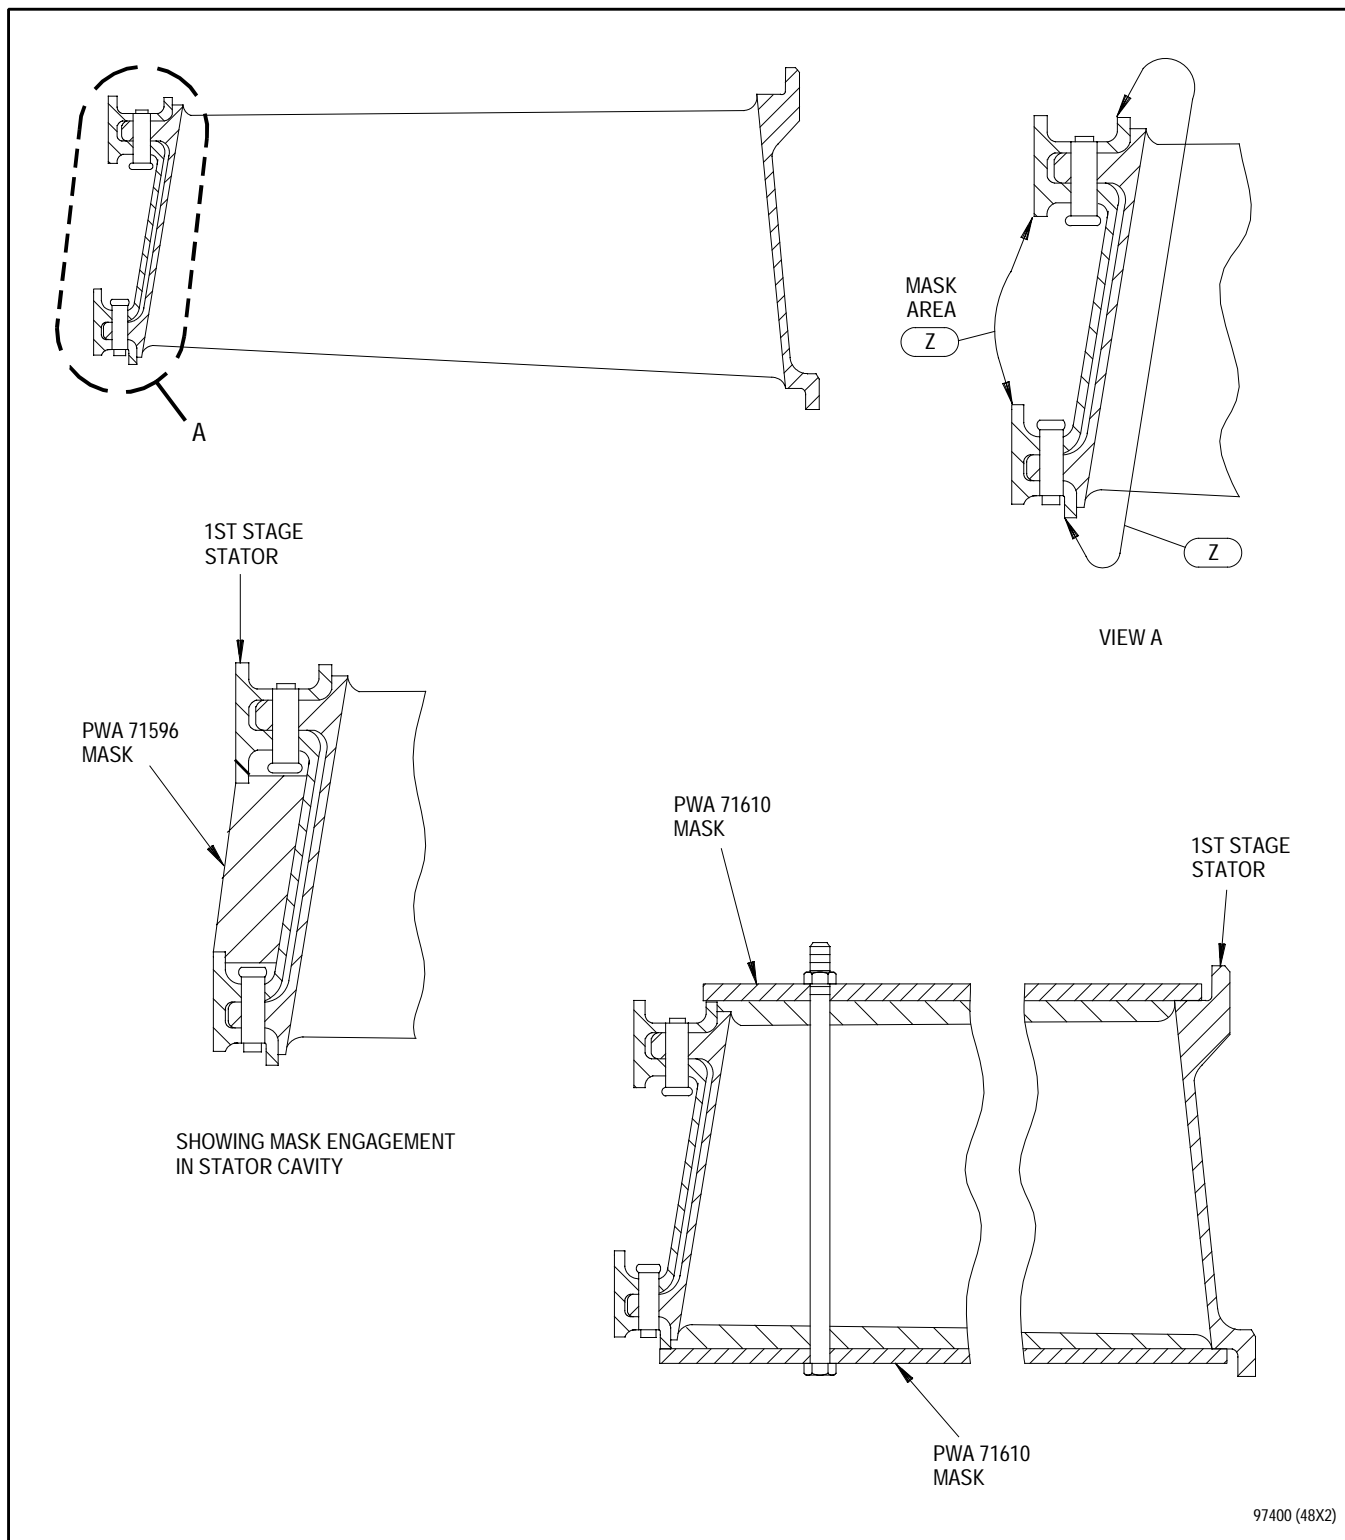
First Stage Compressor Stator Assembly - Masking Locations for Grit Blast
